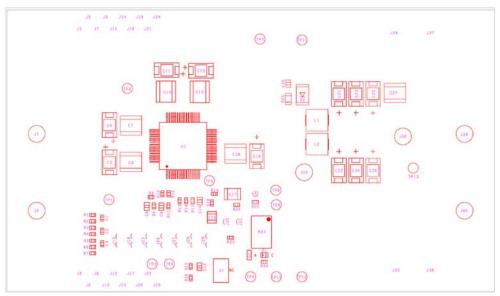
TOP SIDE ASSEMBLY DRAWING
